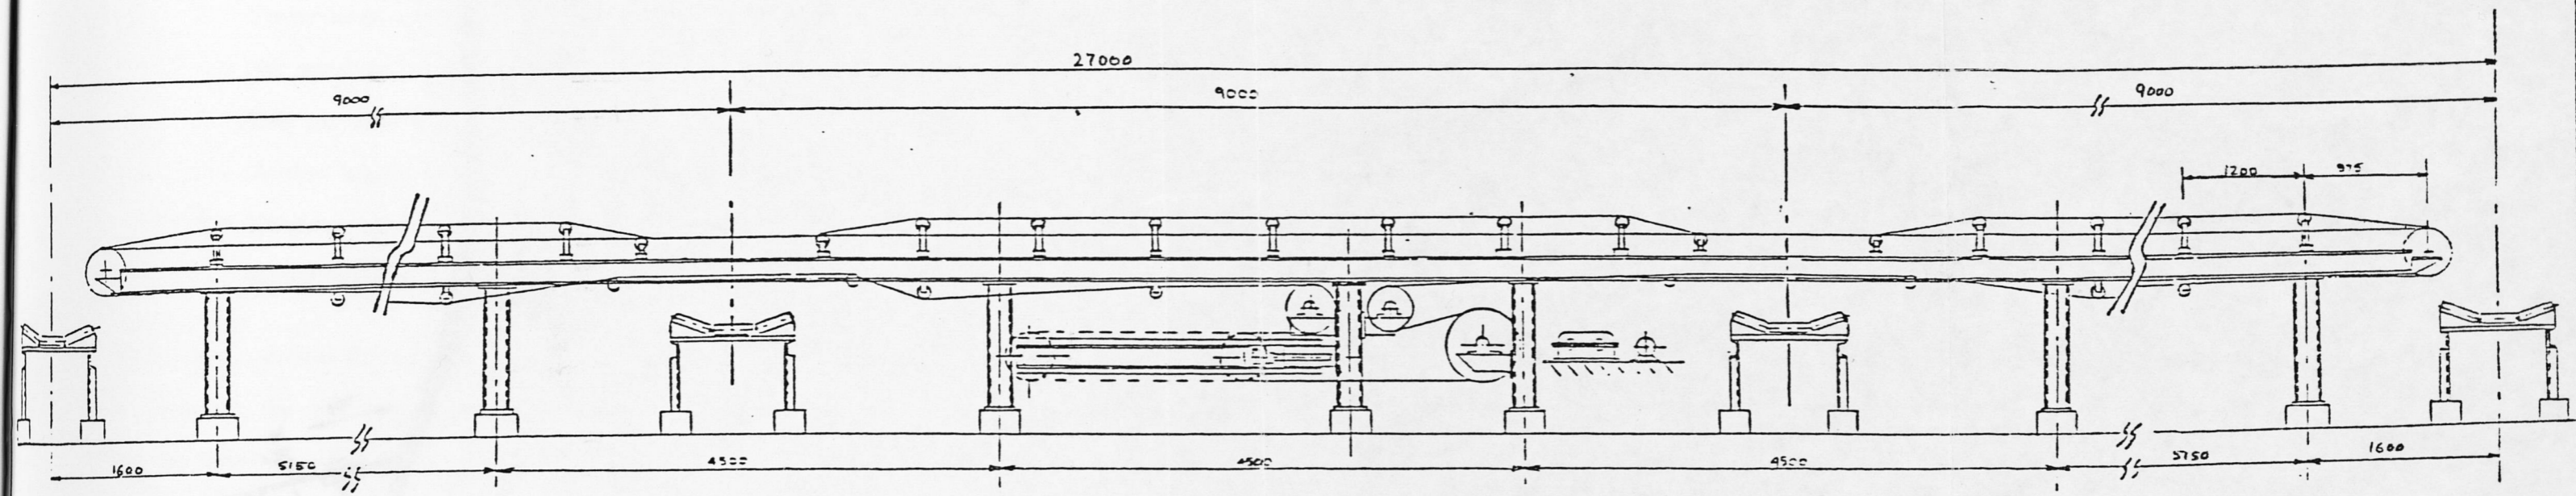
Engineering Drawing of the Main Belt Conveyor.
